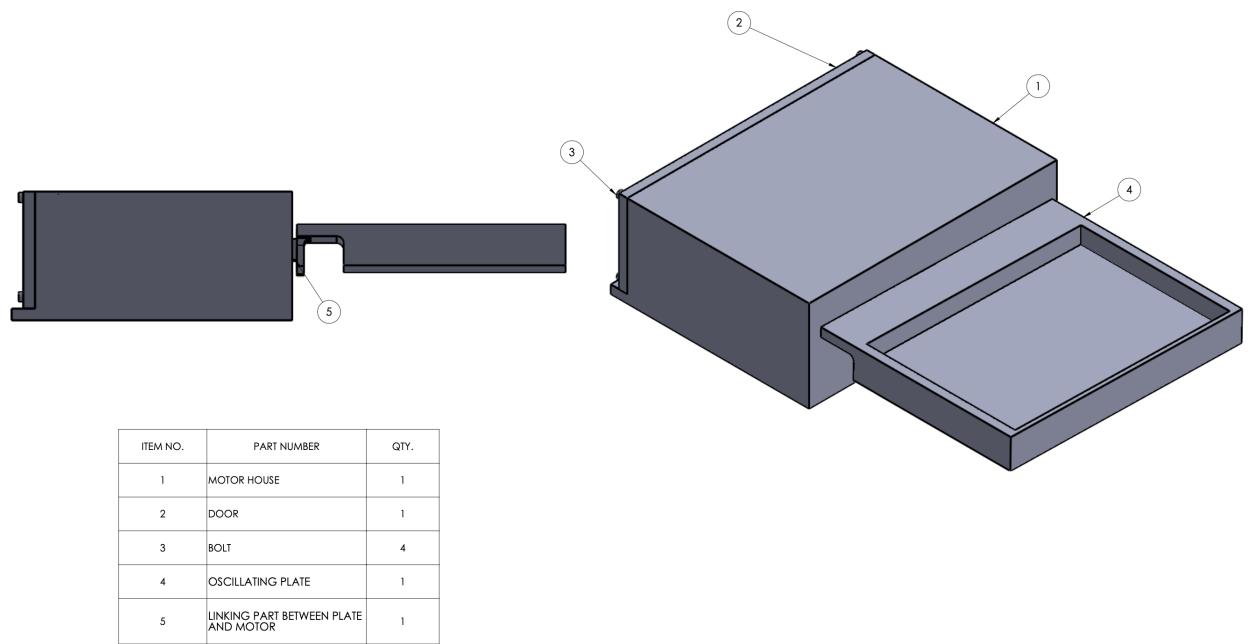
CAD Drawing of the assembly, with the table of material.
